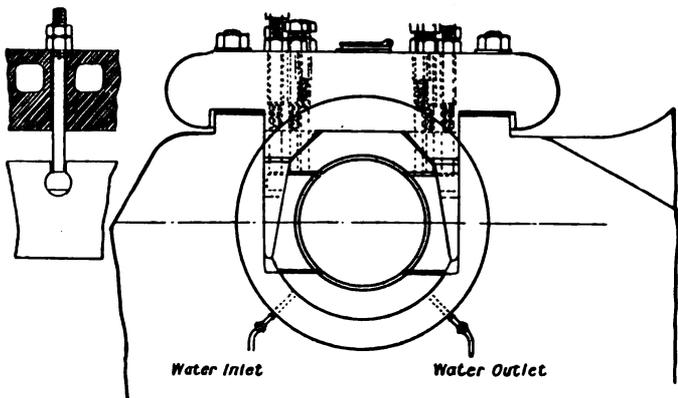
Four-part Bearing, with Wedge Adjustment (Snow Steam Pump Works).
